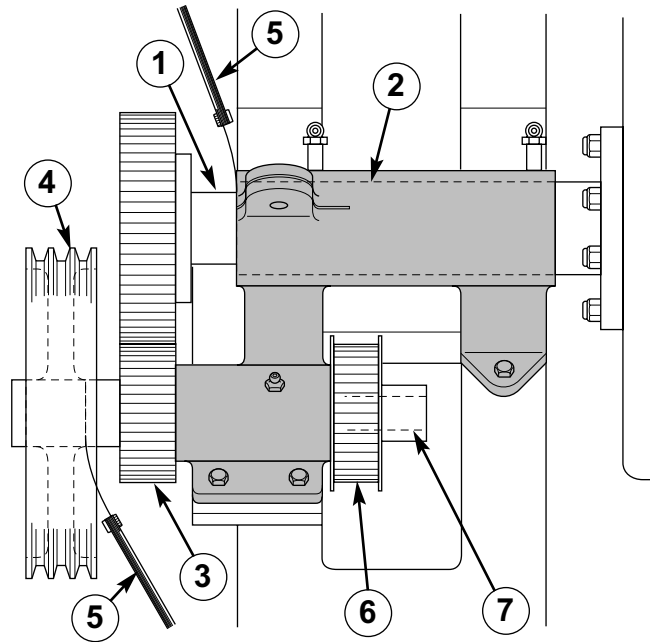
Set a clearance of .004" (.102 mm) between gear hub and bearing, and between gear and pulley. (1) Gear Hub, (2) Impeller Shaft Housing, (3) Gear, (4) Pulley, (5) Feeler Gauge, (6) Pulley Assembly, (7) Drive Shaft.
